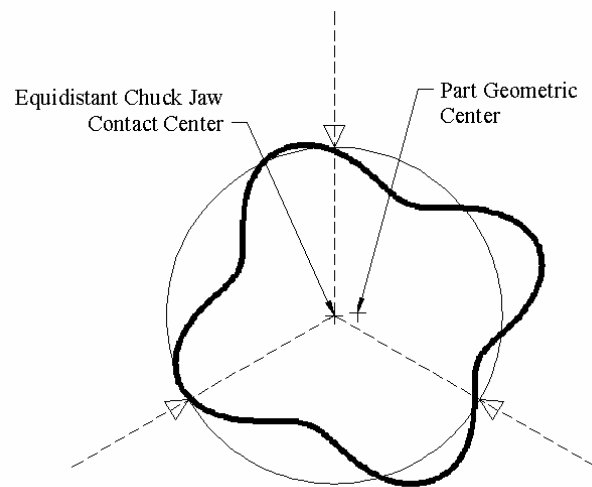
Three-Jaw Chucking of Four-Lobe Part Causing Center Misalignment
